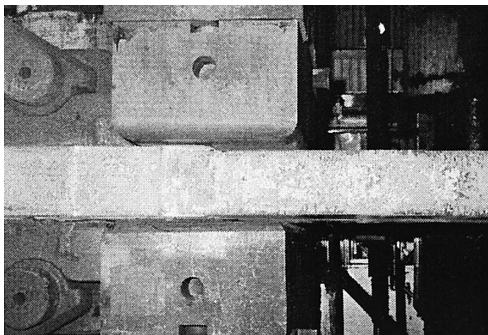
Forging reduction in thicknesswise of continuous casting slab
